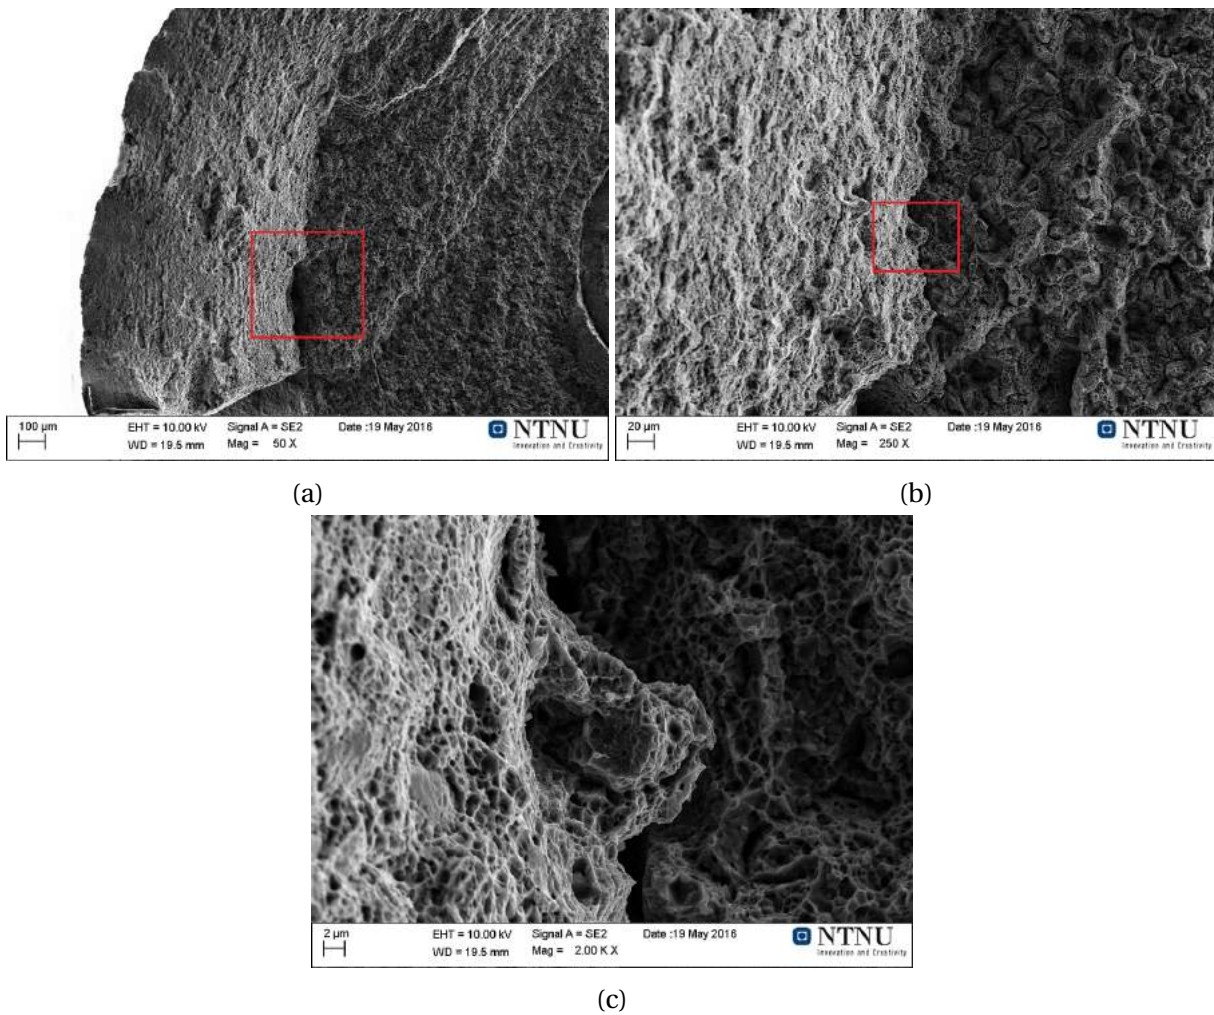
Fracture surface of Al-10%Mg screw extruded machined granulates.
